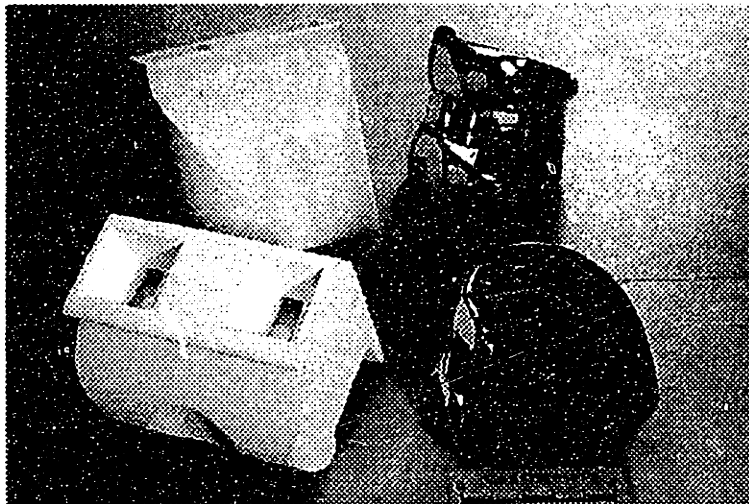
F75 Cobalt -Chromium casting of a knee implant made directly from a 3D printed alumina mold. showed on left.
